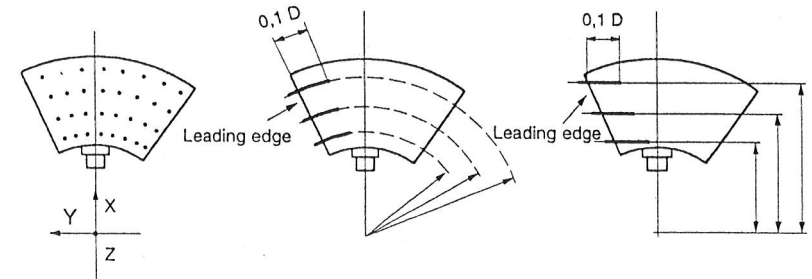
Runner/impeller of axial flow machine. Example of locations for blade profile measuring sections or measuring points
